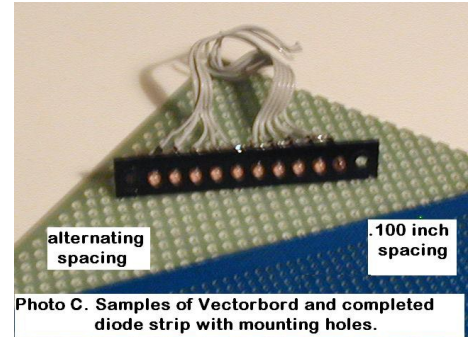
Photo C. Samples of Vectorboard and completed diode strip with mounting holes.
